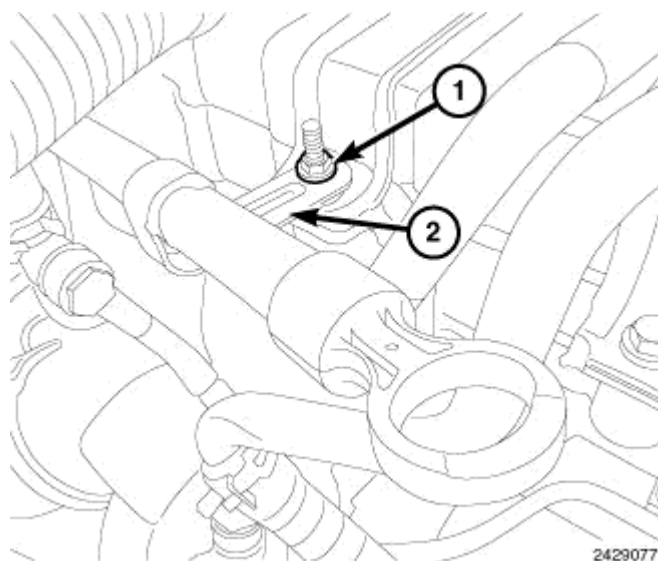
Rear Coolant Tube & EGR Cooler Mounting Bolts
